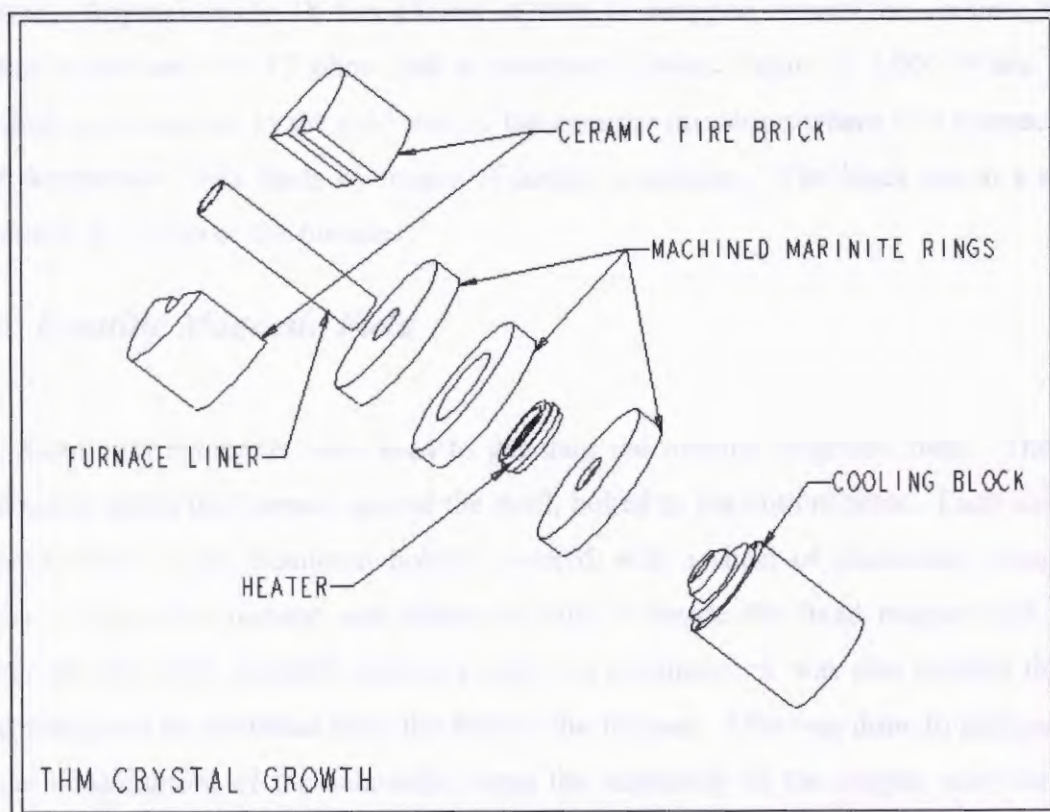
Exploded View of Ceramic Furnace Parts and Cooling Block
